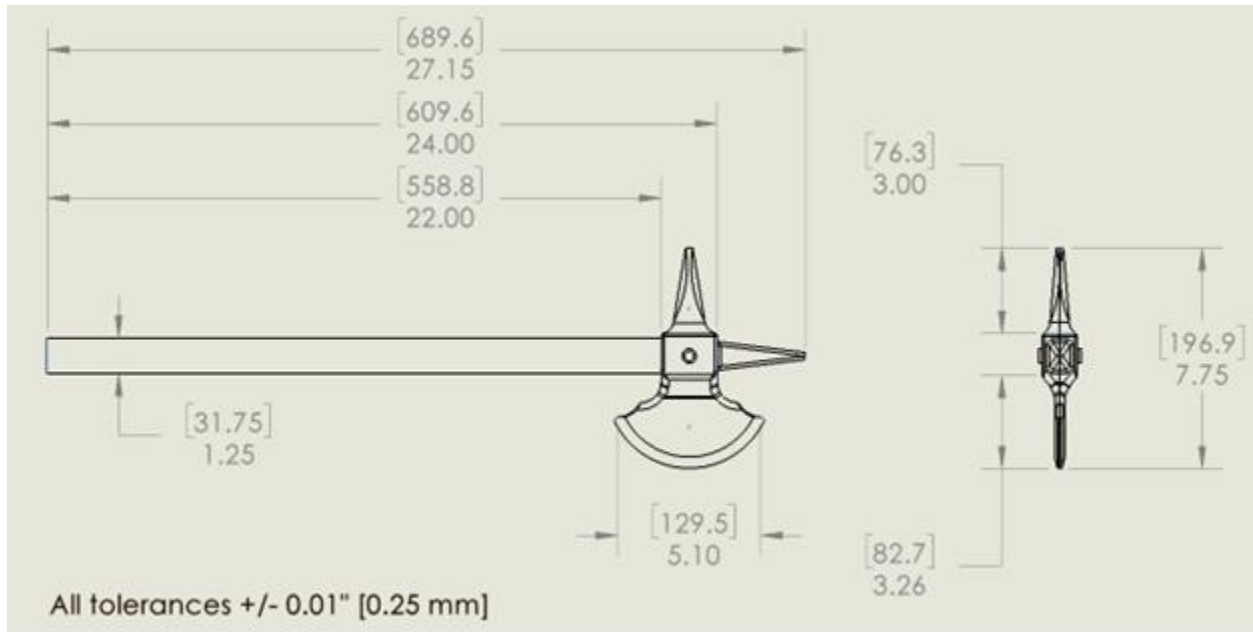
The CAD drawing of the final design, including preliminary dimensions.
